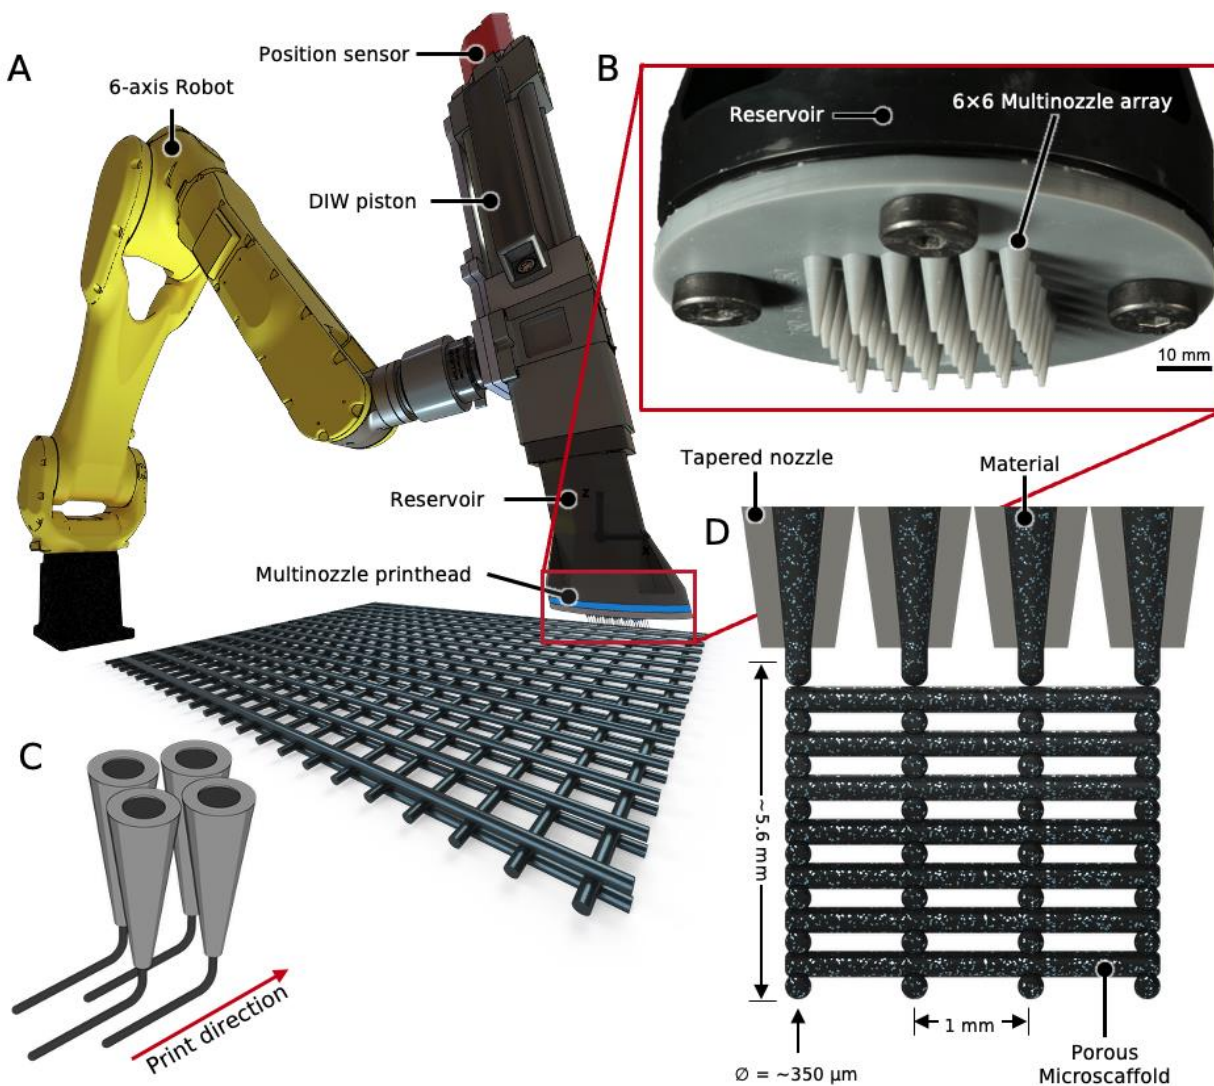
(A) DIW platform comprising a six-axis robotic arm and a custom piston-driven hydraulic extrusion unit capable of pressures up to 20 MPa; the perspective view is adjusted for clarity and is not to scale. (B) Tapered multinozzle printhead integrating the nozzles within a single polymer component. (C) Schematic of a 2×2 grid multinozzle deposition kinematics showing simultaneous extrusion of parallel filaments along the printing direction. (D) Representative orthogonal porous microstructure geometry used to evaluate the performance of the present multinozzle design, with a nominal filament diameter of 350 μm , in-plane spacing of 1 mm, and desired stacking height of 5.6 mm.
